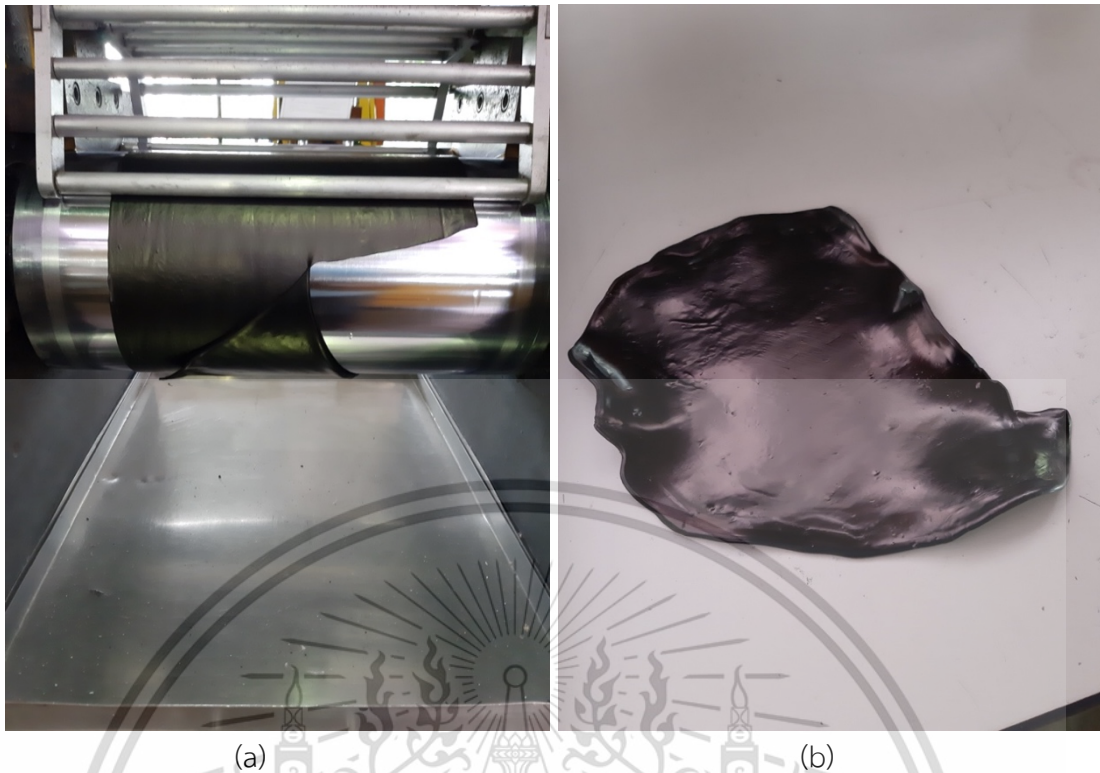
(a) Rubber compounding by cut and fold method, (b) Rubber sheet ready for Mooney viscosity test, cure time test and compress molding.
